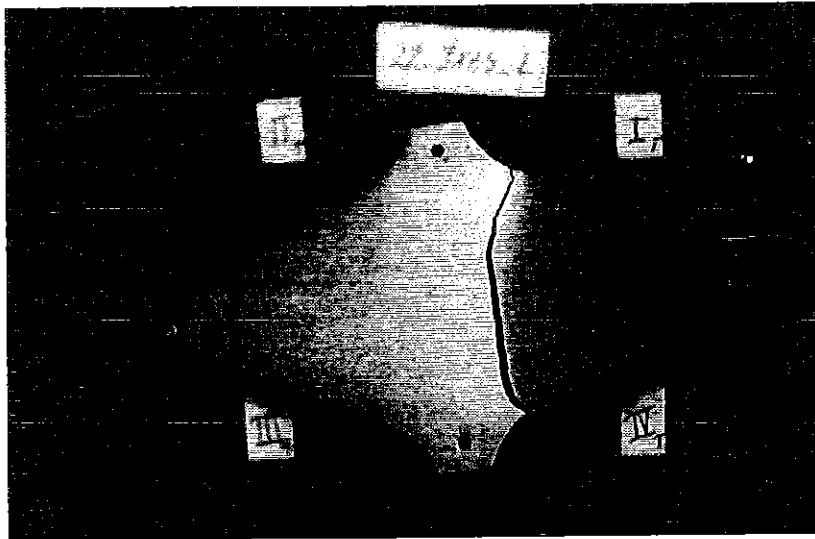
Photograph of top of failure surface of plate specimen 3x1.5 in (7.6x3.8 cm)
